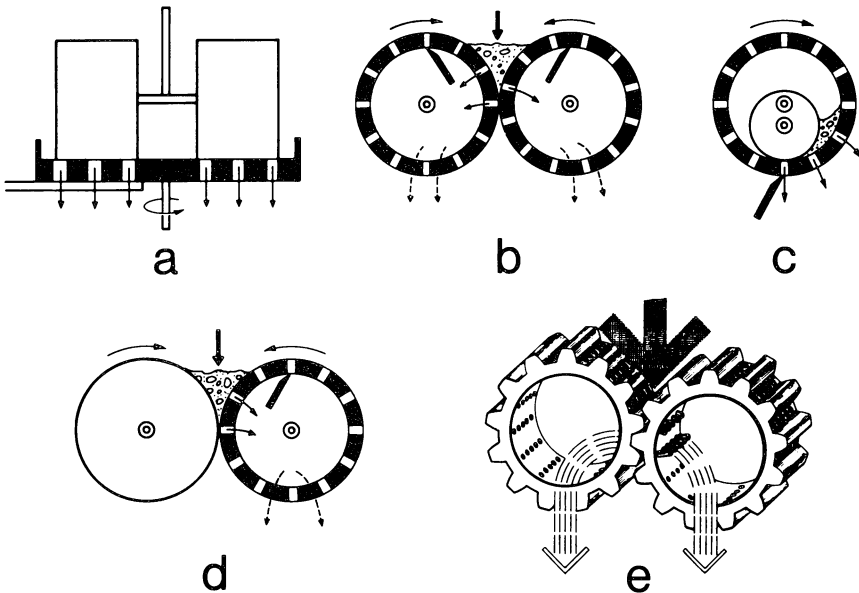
Various designs of roll-type extrusion presses or pellet mills [21]. (a) Horizontal perforated plate die. (b) Extrusion through both side-by-side rolls. (c) Outward extrusion through large die roll. (d) Extrusion through only one of side-by-side rolls. (e) Die holes at root of intermeshing gears.
